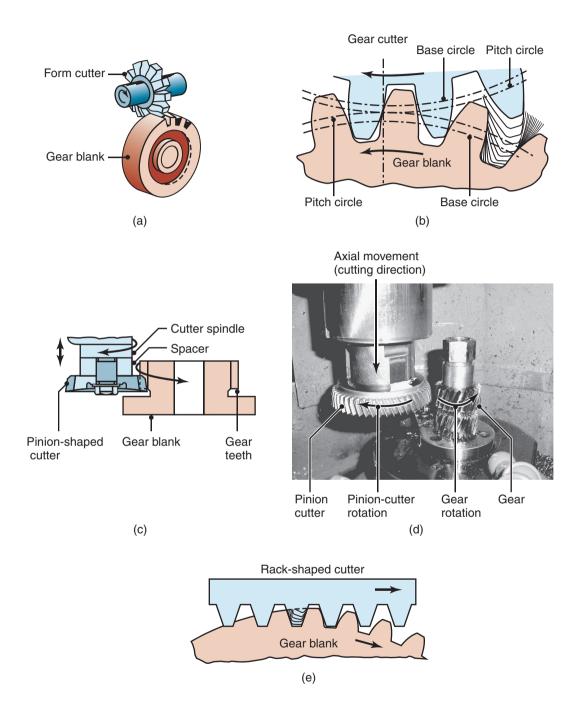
(a) Producing gear teeth on a blank by form cutting. (b) Schematic illustration of gear generating with a pinion-shaped gear cutter. (c) and (d) Gear generating in a gear shaper using a pinion-shaped cutter. Note that the cutter reciprocates vertically. (e) Gear generating with rack-shaped cutter. *Source:* (d) Courtesy of Steve Schmid, with permission from Schafer Gear Works.
